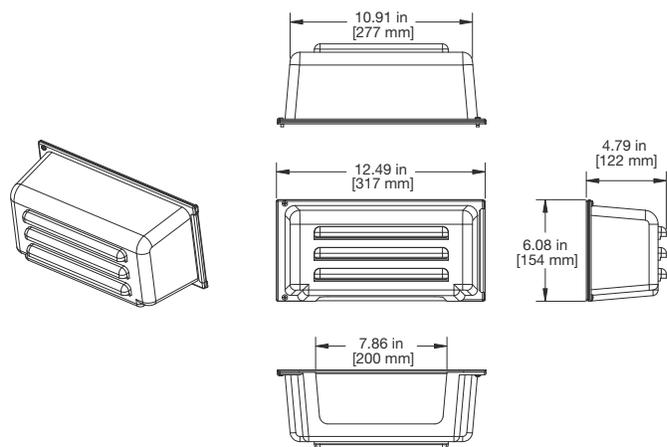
Horizontal Rain Hood Dimensions: Upper Rain Hood Assembly
